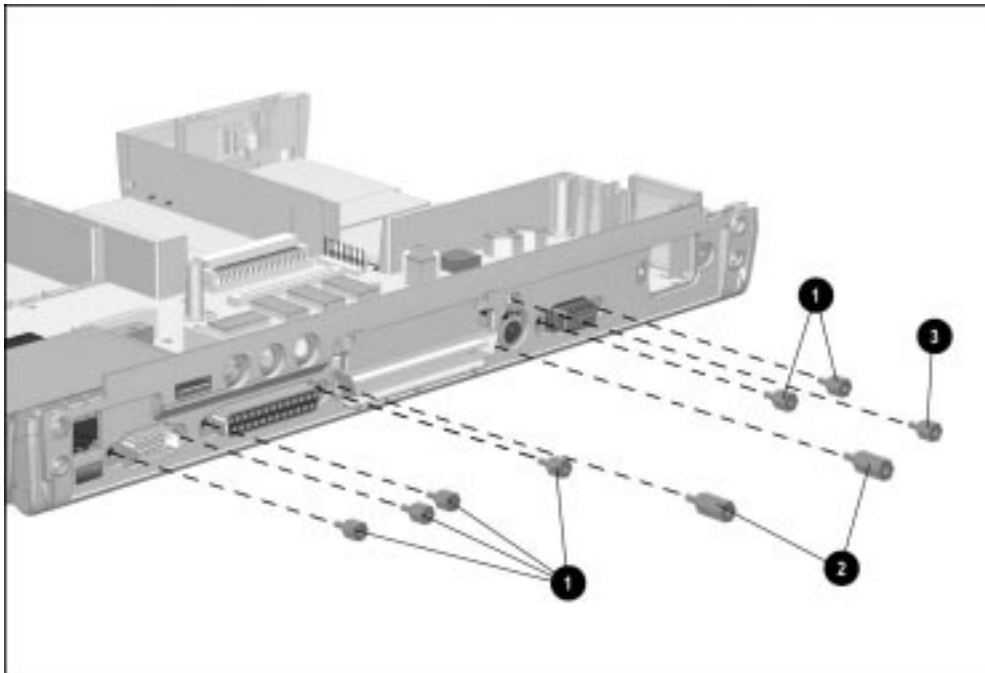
Removing the System Board Screwlocks and Keyboard/Mouse Connector Screw
